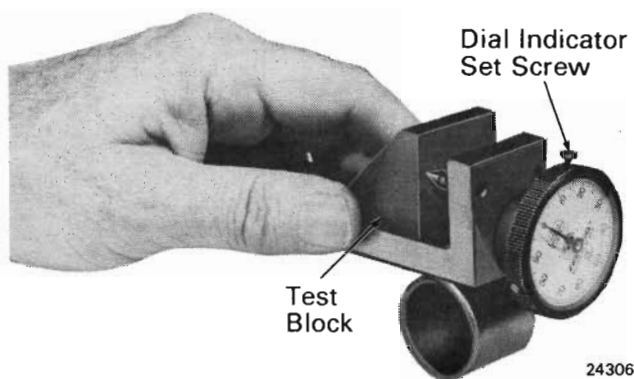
Checking Head Retainer Wear Step Gauge Calibration
